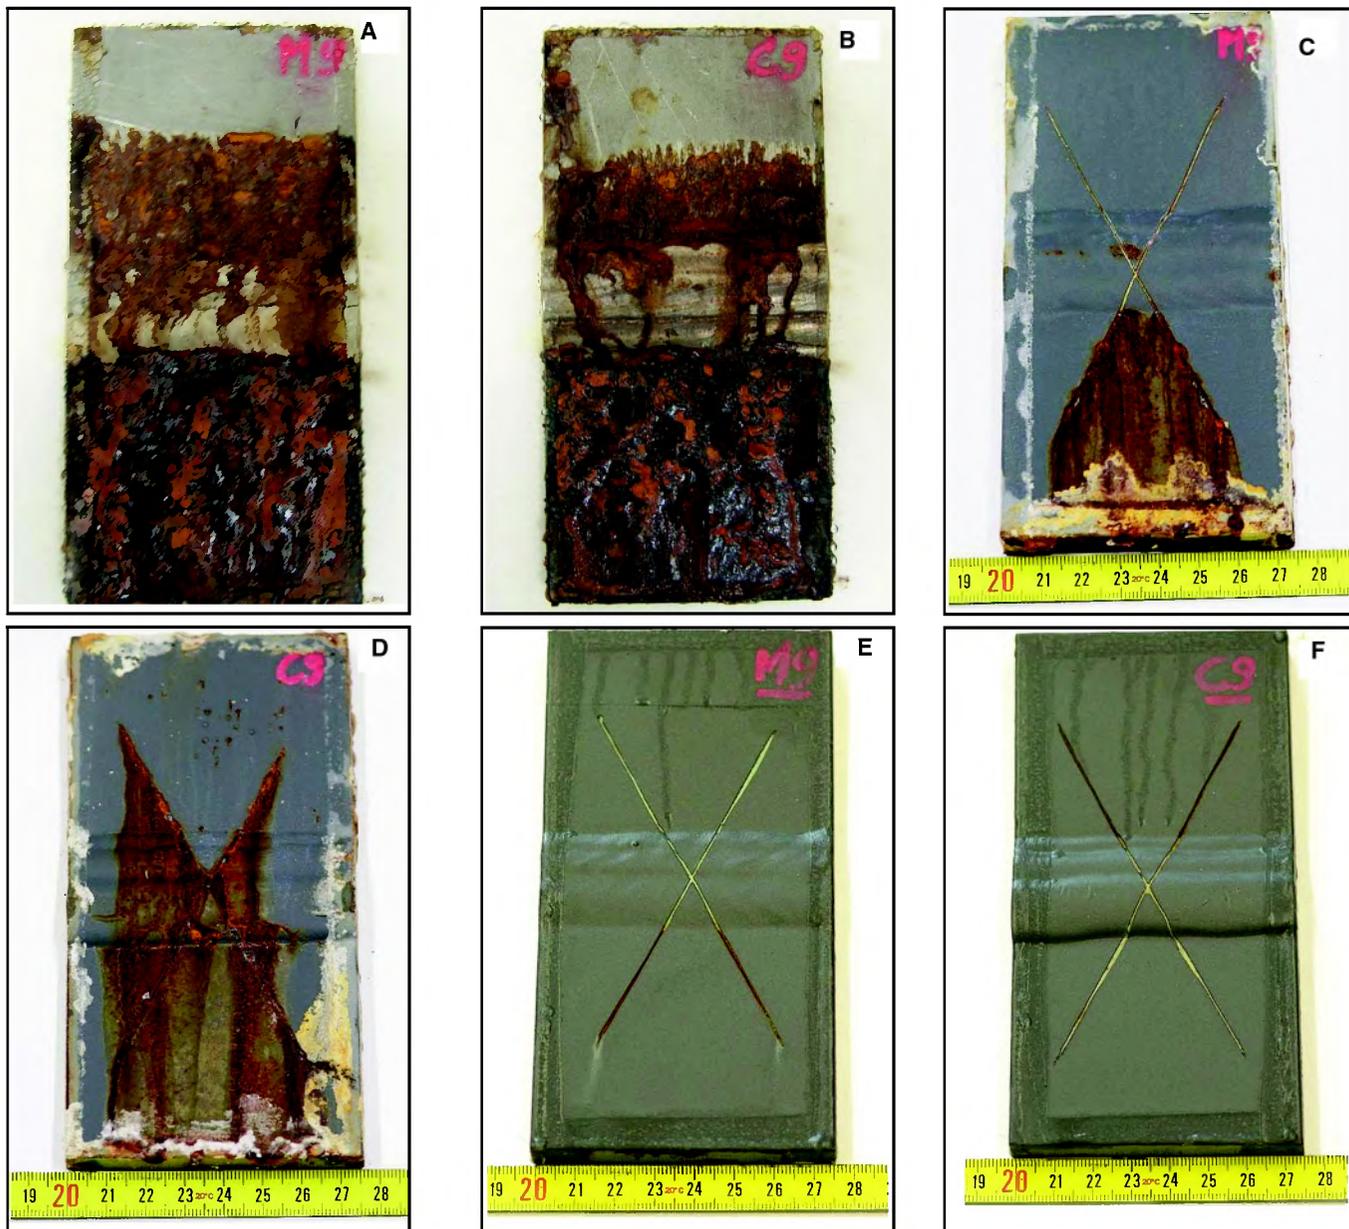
Photographs of the corrosion test samples. A and B — Uncoated salt spray samples after 350 h; C and D — coated salt spray samples after 1000 h; E and F — coated blister samples after 3120 h of exposure for SMA and SA welds, respectively.
